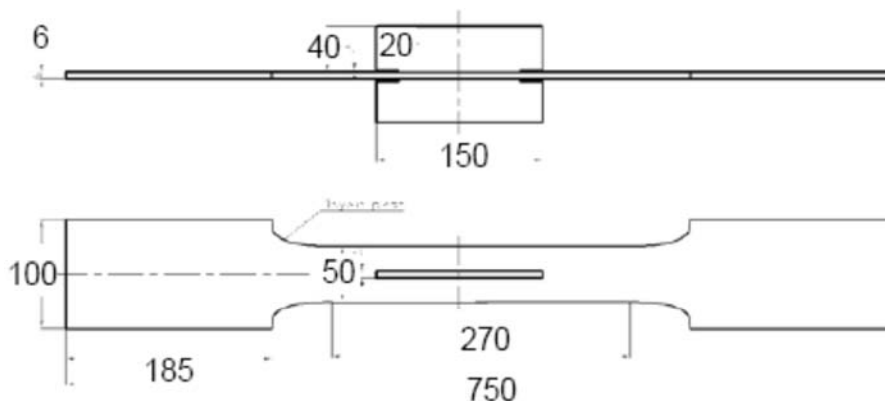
Specimen geometry for fatigue testing of 960 MPa yield strength steel welded elements [14]
